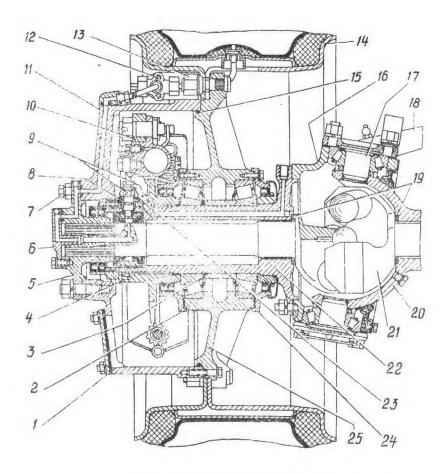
FRONT WHEEL (SECTIONAL VIEW)
